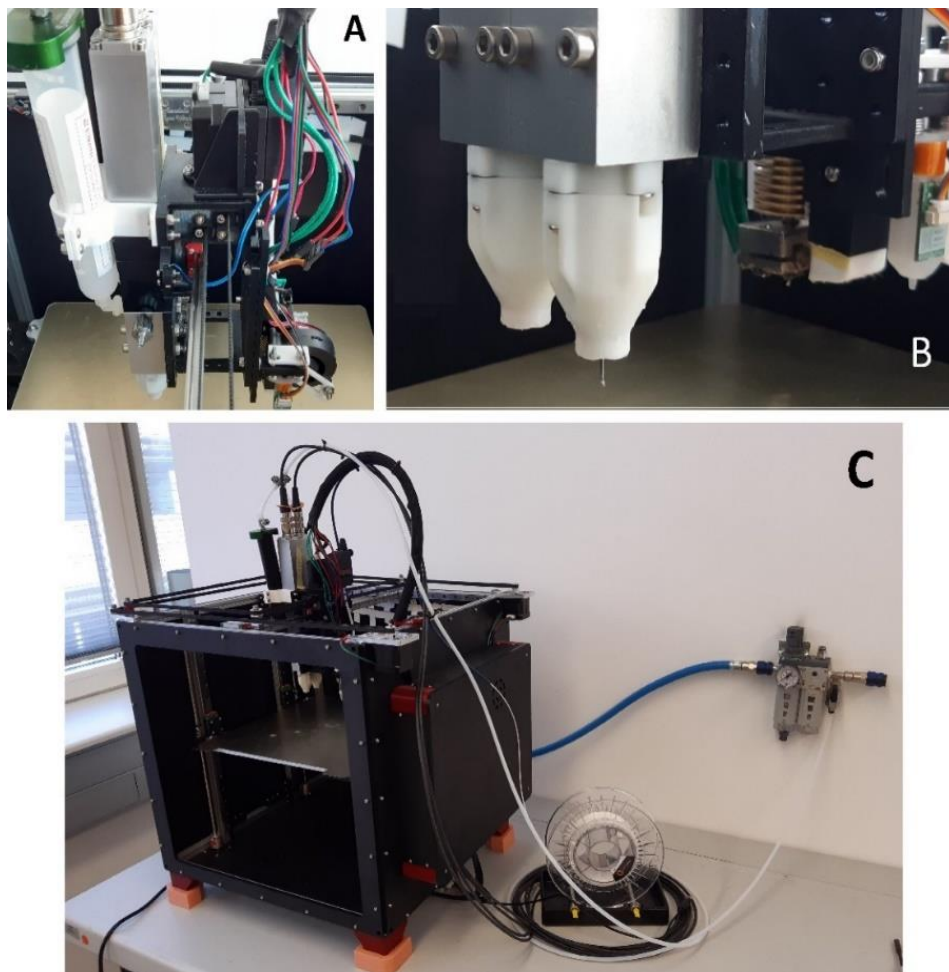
(A) The moving unit of the Railcore II 300 ZL printer, extended with the Viscotec Vipro-HEAD 3/3 fluid extruder; (B) the printing nozzles; (C) the printer frame
